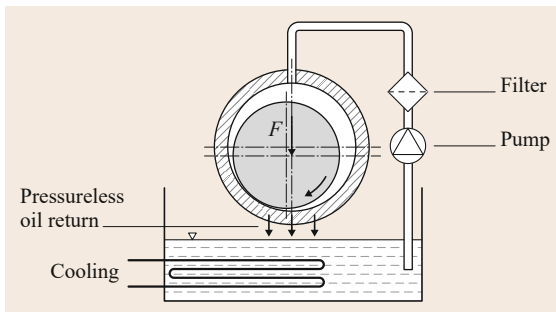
Circulating oil lubrication with cooling (schematic)
